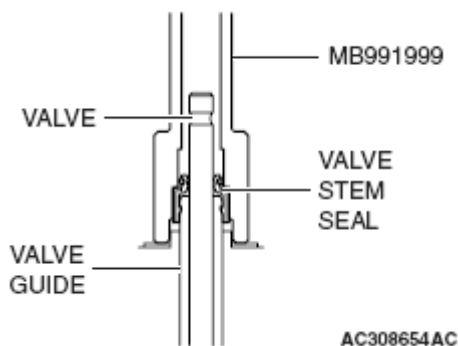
Identifying Special Tool MB991999, Valve Stem Seal And Valve Guide
